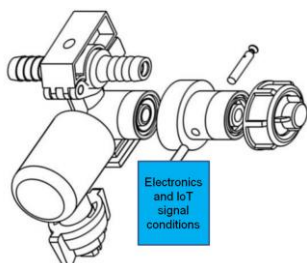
Technical draw of the intelligent pH sensor assembled on the nozzle for direct injection sprayer.
